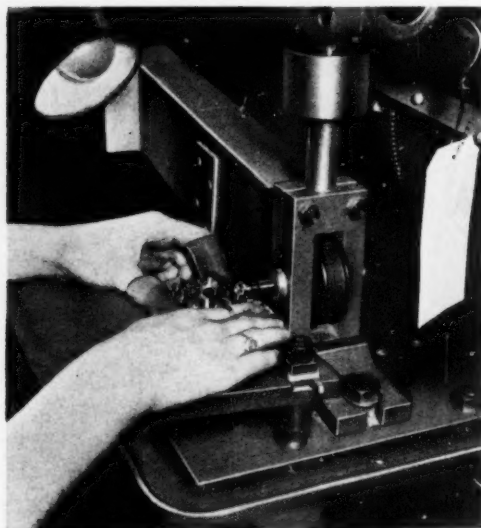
With this Special-purpose Horizontal Spindle, a Skilled Operator Can De-burr a Double-row Ball Cage, with 13 Pockets per Side, in 10 sec.
